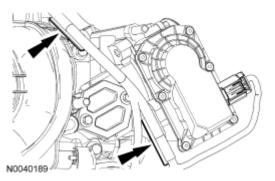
Locating Wiring Harness Pin-Type Retainers From Intake Manifold Courtesy of FORD MOTOR CO.
